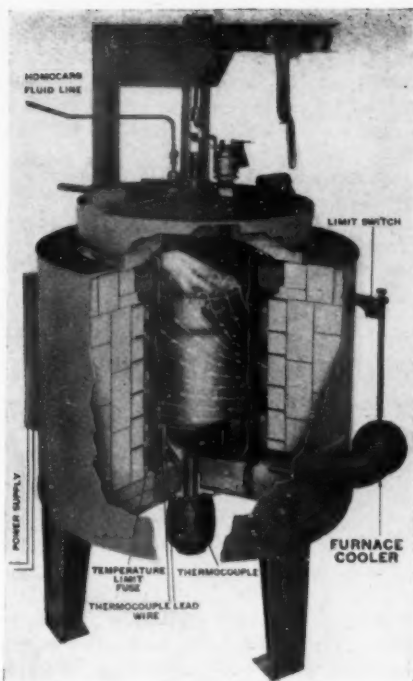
The Homocarb furnace which employs the drip-feed method for producing the carburising atmosphere.
